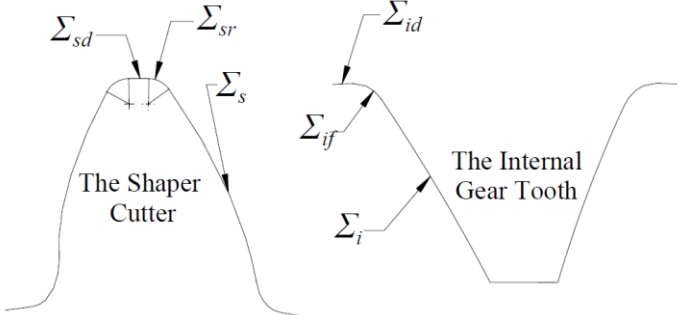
Generating parts of pinon type shaper cutter and the corresponding generated parts of internal spur gear tooth
